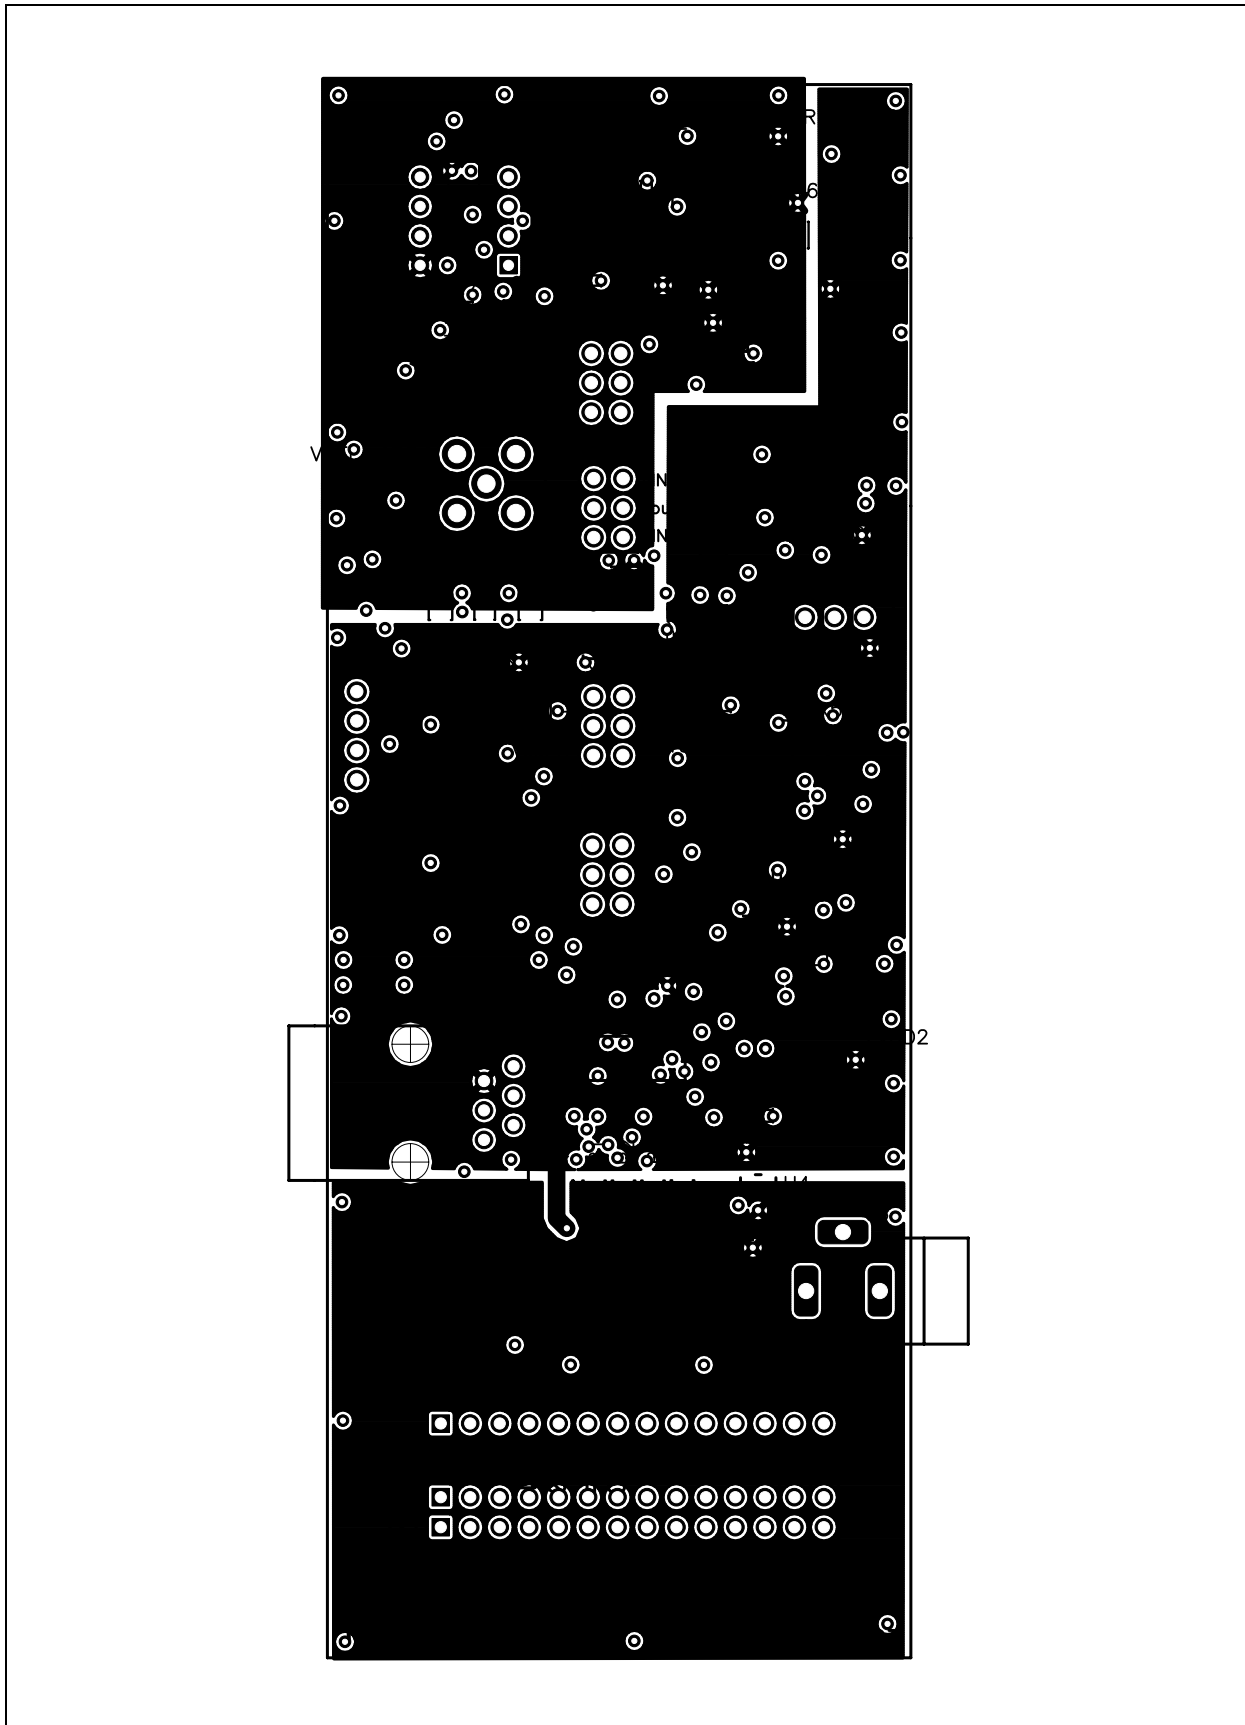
BOARD LAYOUT - POWER LAYER
